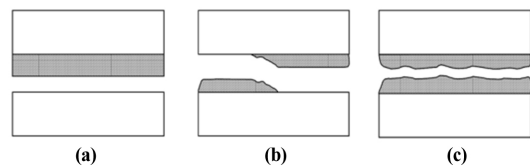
Failure modes of the adhesively bonded joint: (a) Interfacial failure, (b) transient failure, (c) cohesive failure.
